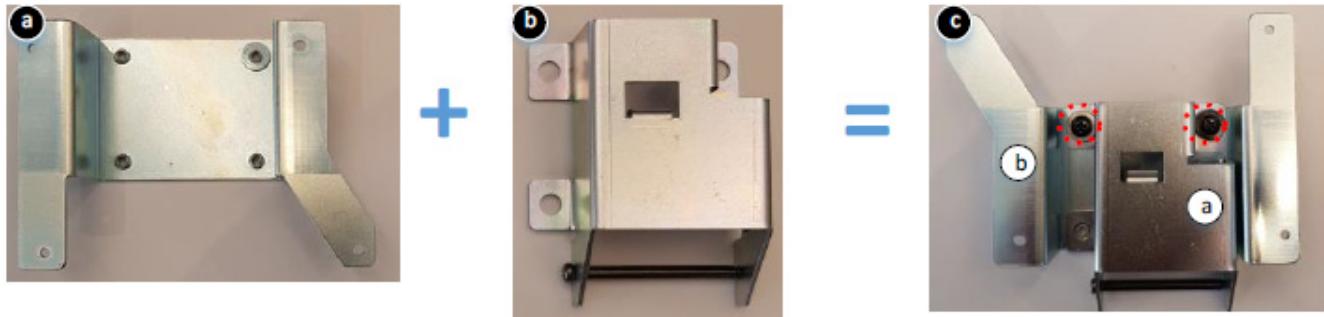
Attaching ECG Bracket to Printer Bracket
